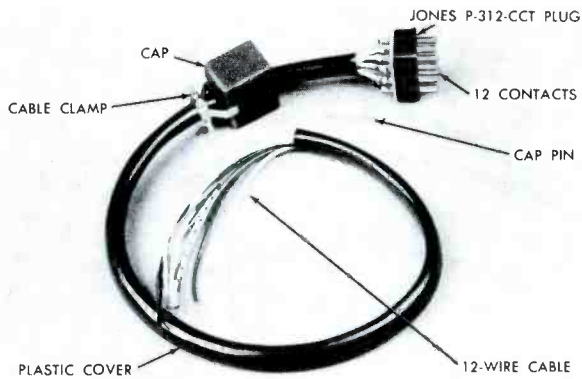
Jones P-312-CCT Plug Attached to 12-Wire Cable.
